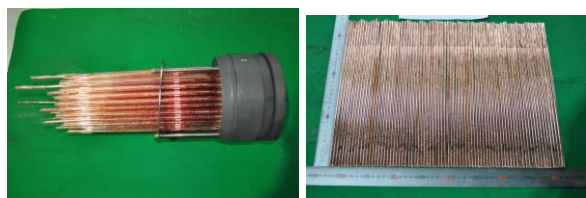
Mold bundle after casting (left) and Cu slugs after mold removal(right)
